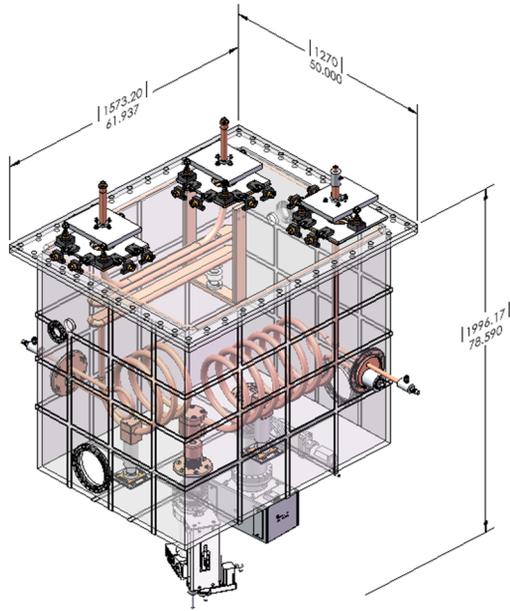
Engineering design of the RF sweeper with overall dimensions in millimeters (in brackets) and inches.
